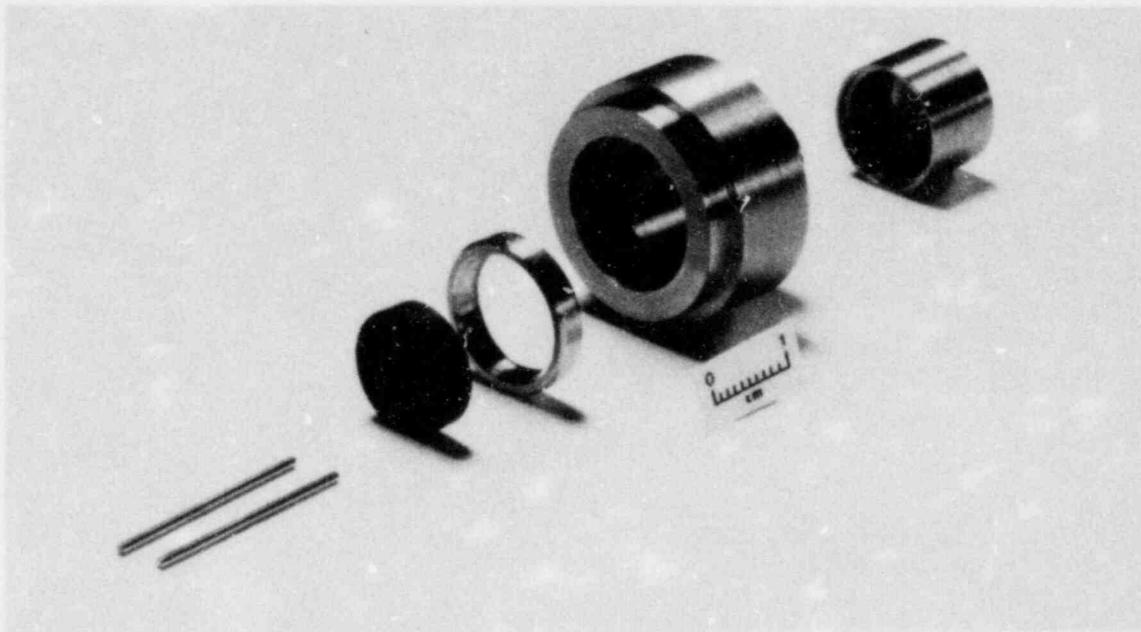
Components for Primärkreislauf in-wall film probe sub-assembly. From left: platinum posts, cermet insulator, platinum transition ring, type 446 stainless steel body, and end cap.
